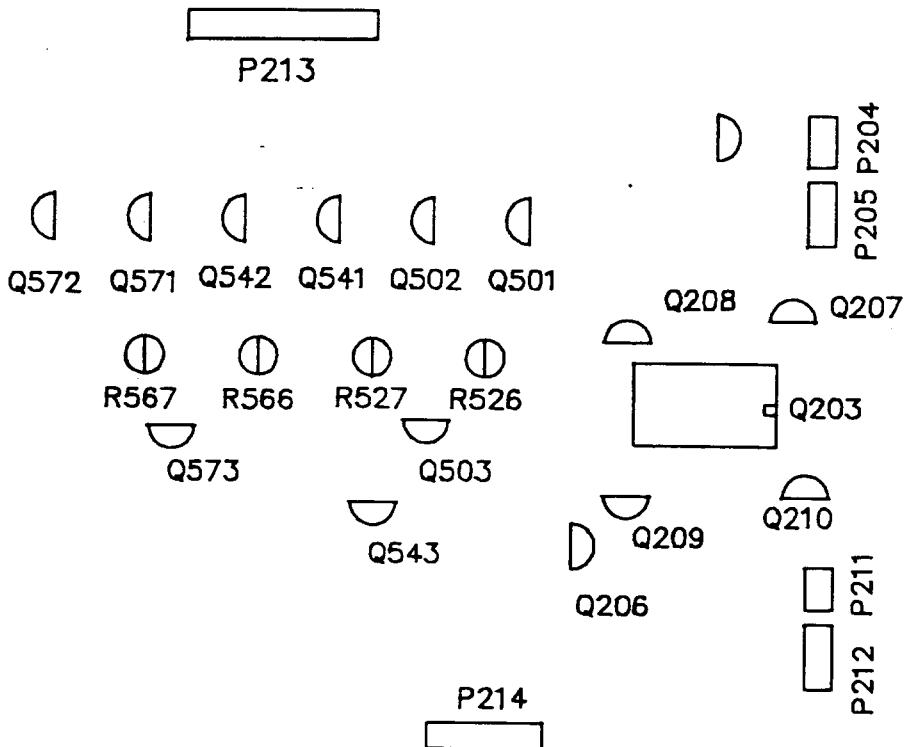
PCB-VIDEO DRIVE adjustment and test location
